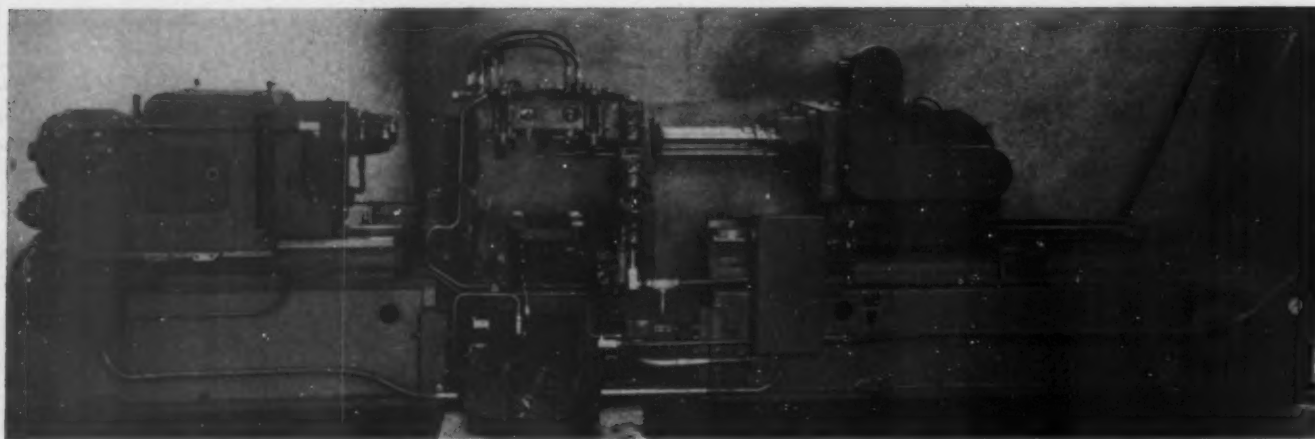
Horizontal boring machine on which positive stop automatic positioning is used to control insertion of tool into work. Photo, courtesy Baush Machine Tool Co.
